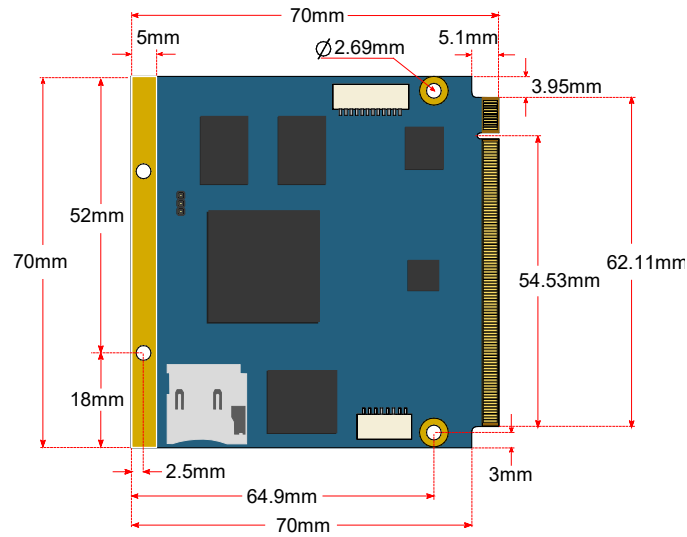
Dimensions of the VIA QSM-8Q60 module (top view)
